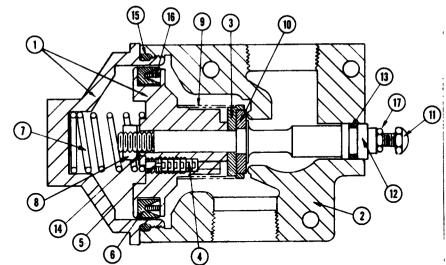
FLUSH VALVE ASSEMBLY WITH WHITE CAP (486172-001).
